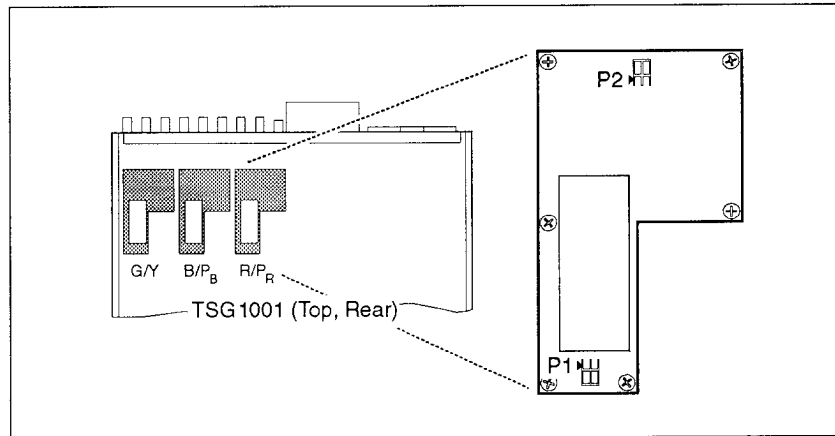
The TSG 1001 "piggy-back" filter boards (cover shield removed).
